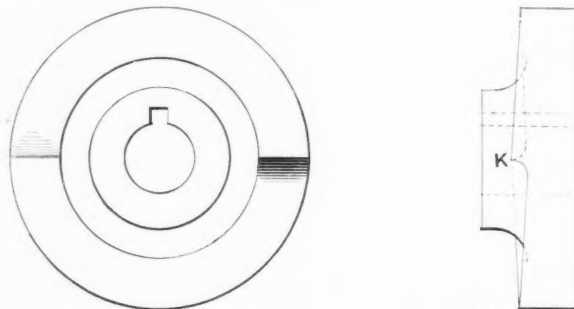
Two-step Cam for use in Relieving Face-cutters.
